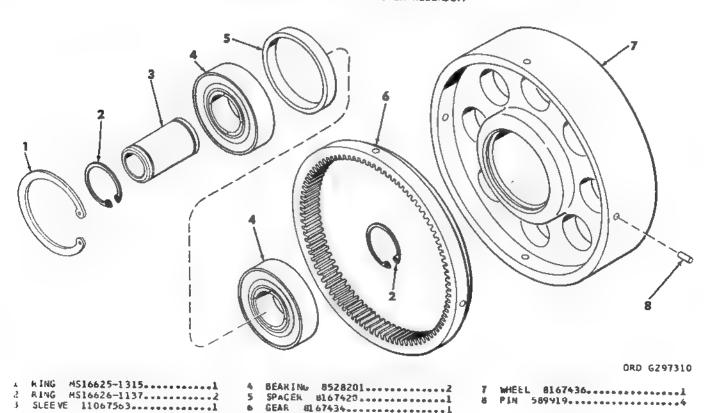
WHEEL ASSEMBLY /8167435/ /SEE FIGURE 8 FOR NEXT HIGHER ASSEMBLY/
